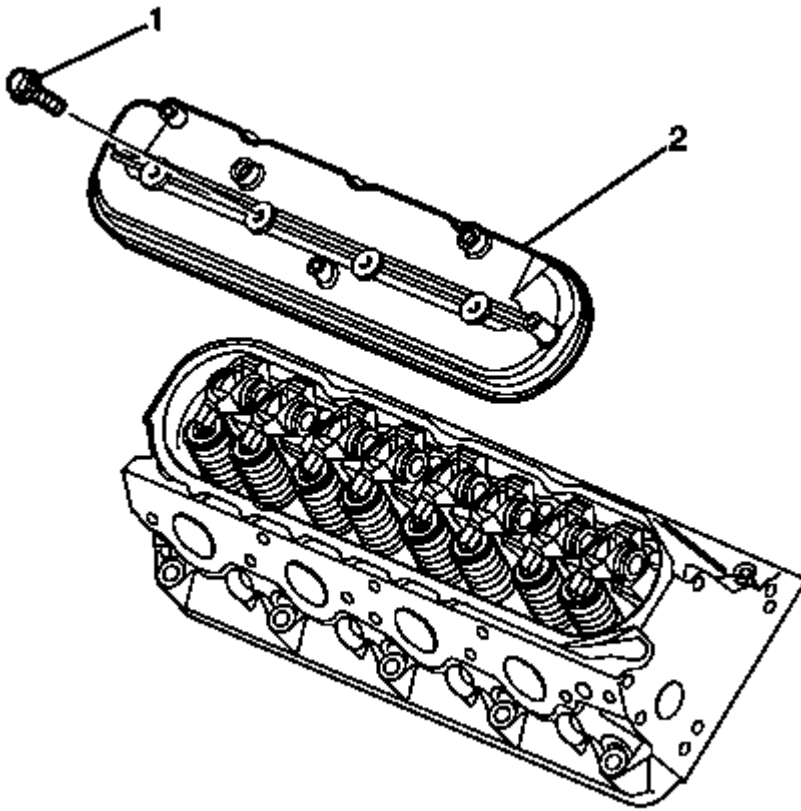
Identifying Valve Rocker Arm Cover To Cylinder Head Retaining Bolts (Left Side)
